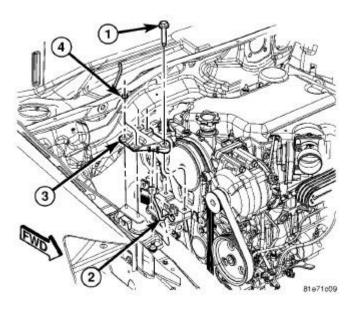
Upper Engine Mount Bracket Courtesy of CHRYSLER LLC
